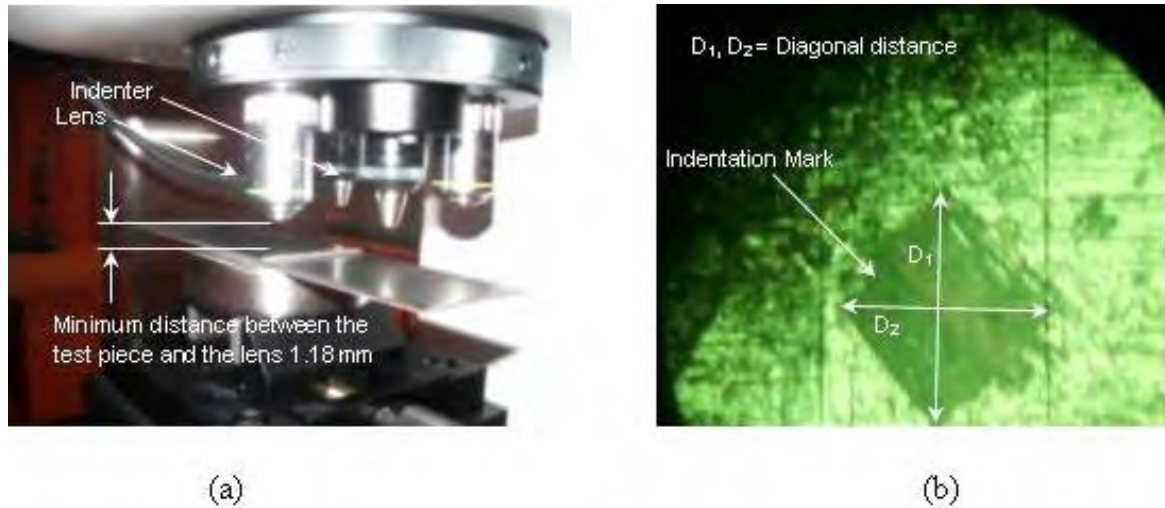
Hardness testing of welded sample (a) testing set up (b) indentation marks
